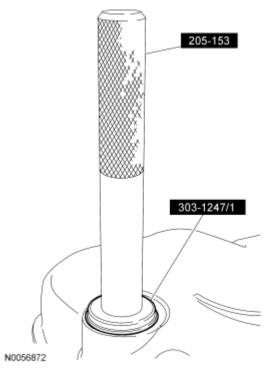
Removing Seals Using Special Tools (205-153) & (303-1247/1) Courtesy of FORD MOTOR CO.
